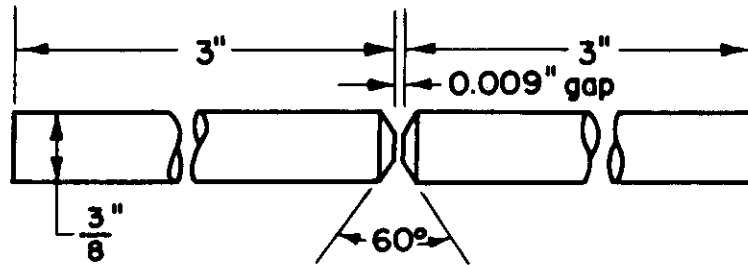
SKETCH OF SPECIMENS USED IN FLASH-WELDING TESTS
